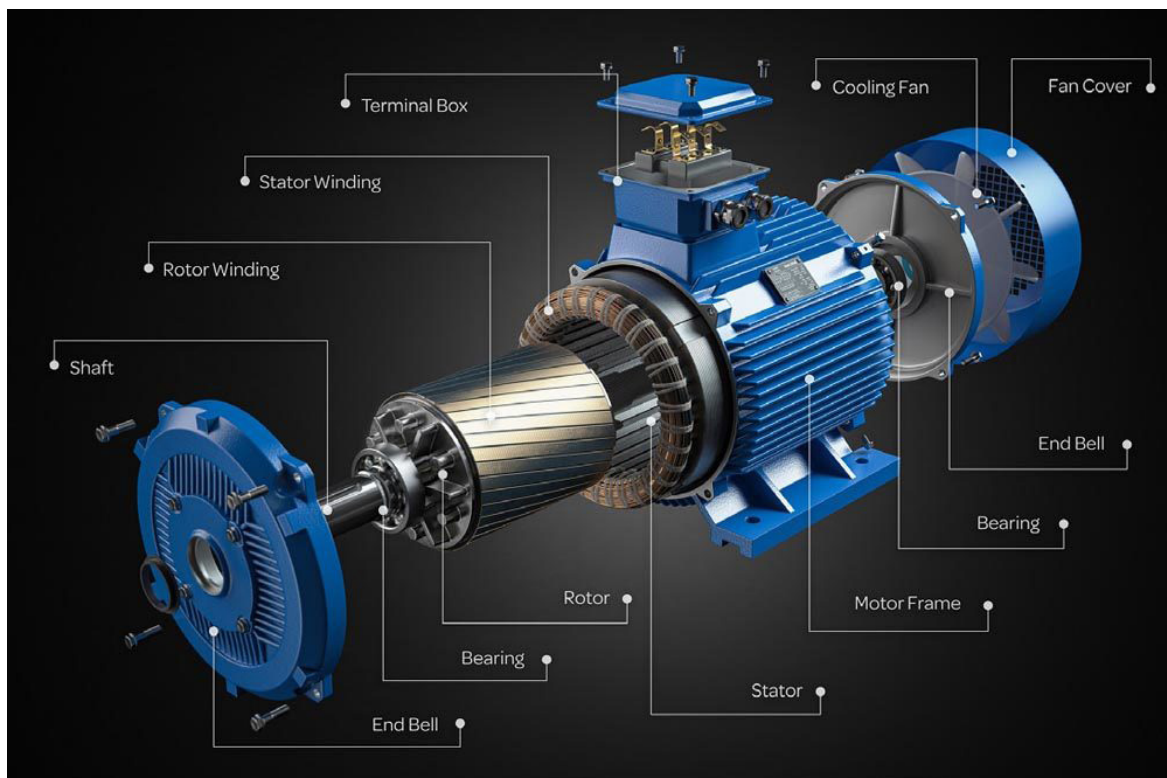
Cut-away view of wound rotor motor with no slip rings (Source: iStock)
